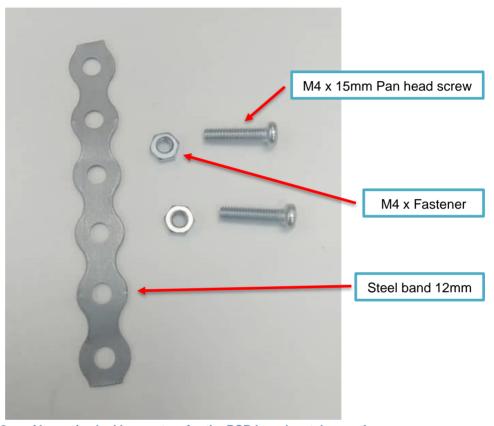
e – Alternative locking system for the PCB board metal mounting.
